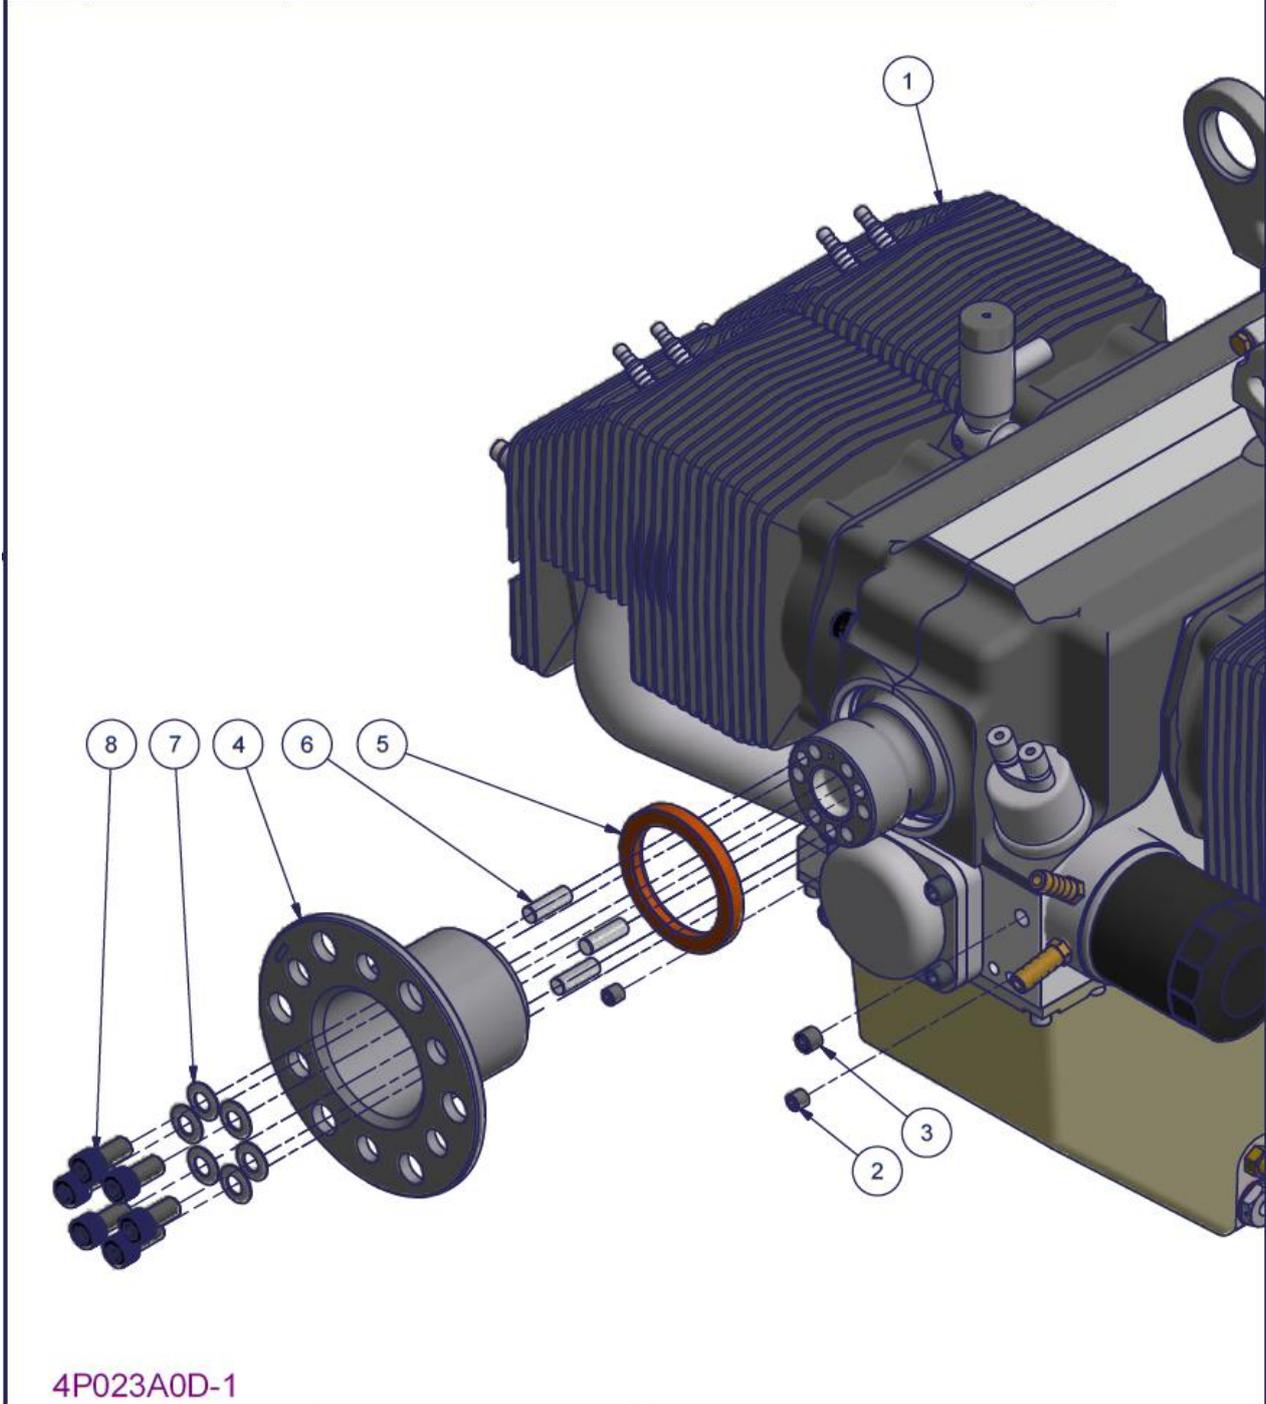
2200/3300 Front seal and propeller flange (integral seal) – Parts List
